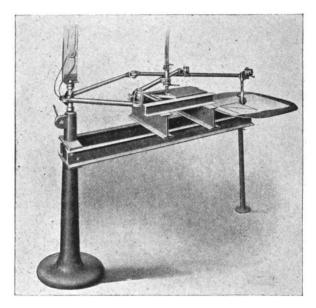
Oxygraph for Cutting Steel According to Pattern with Oxy-Acetylene Flame
